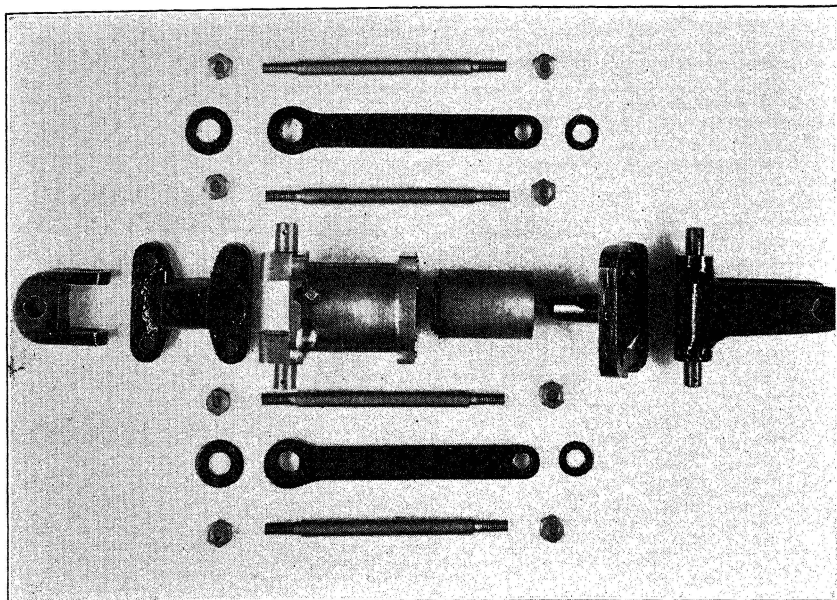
Medium Sized Hydraulic Unit Disassembled.
